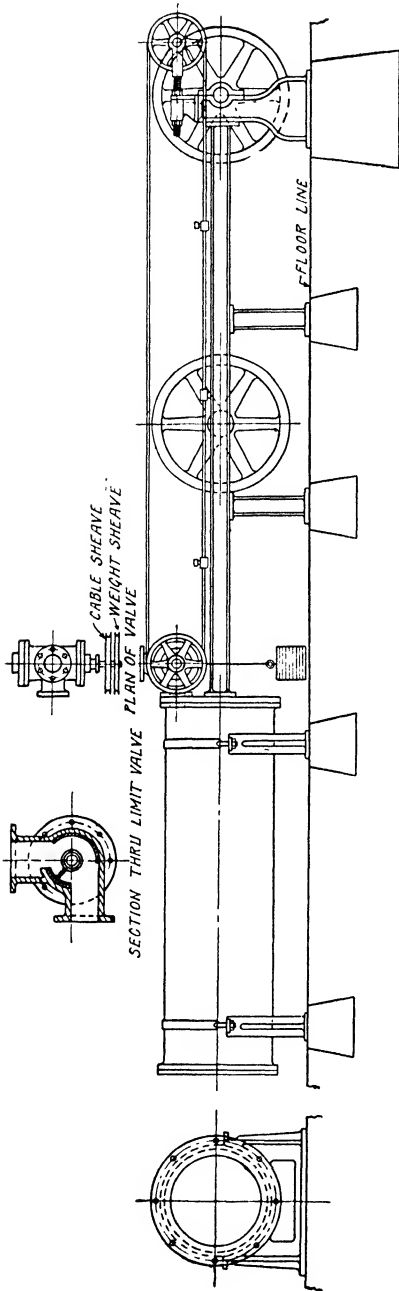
Hydraulic Pull Machine Fitted with Whittier Limit Valve
